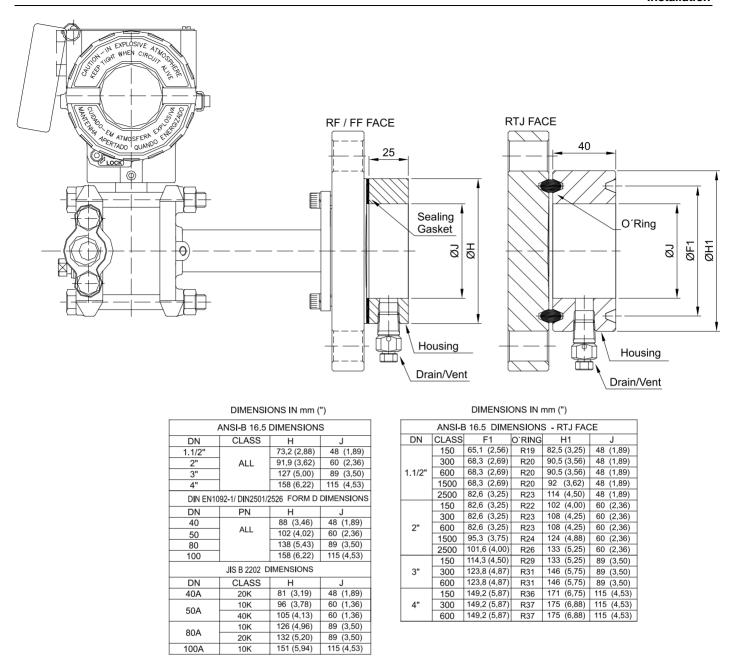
(d) – Dimensional Drawing and Mounting Position - Flanged Pressure Transmitter with Housing
